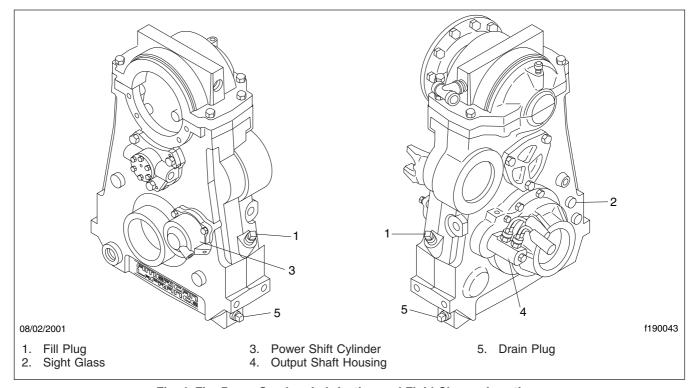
, Fire Pump Gearbox Lubrication and Fluid Change Locations
